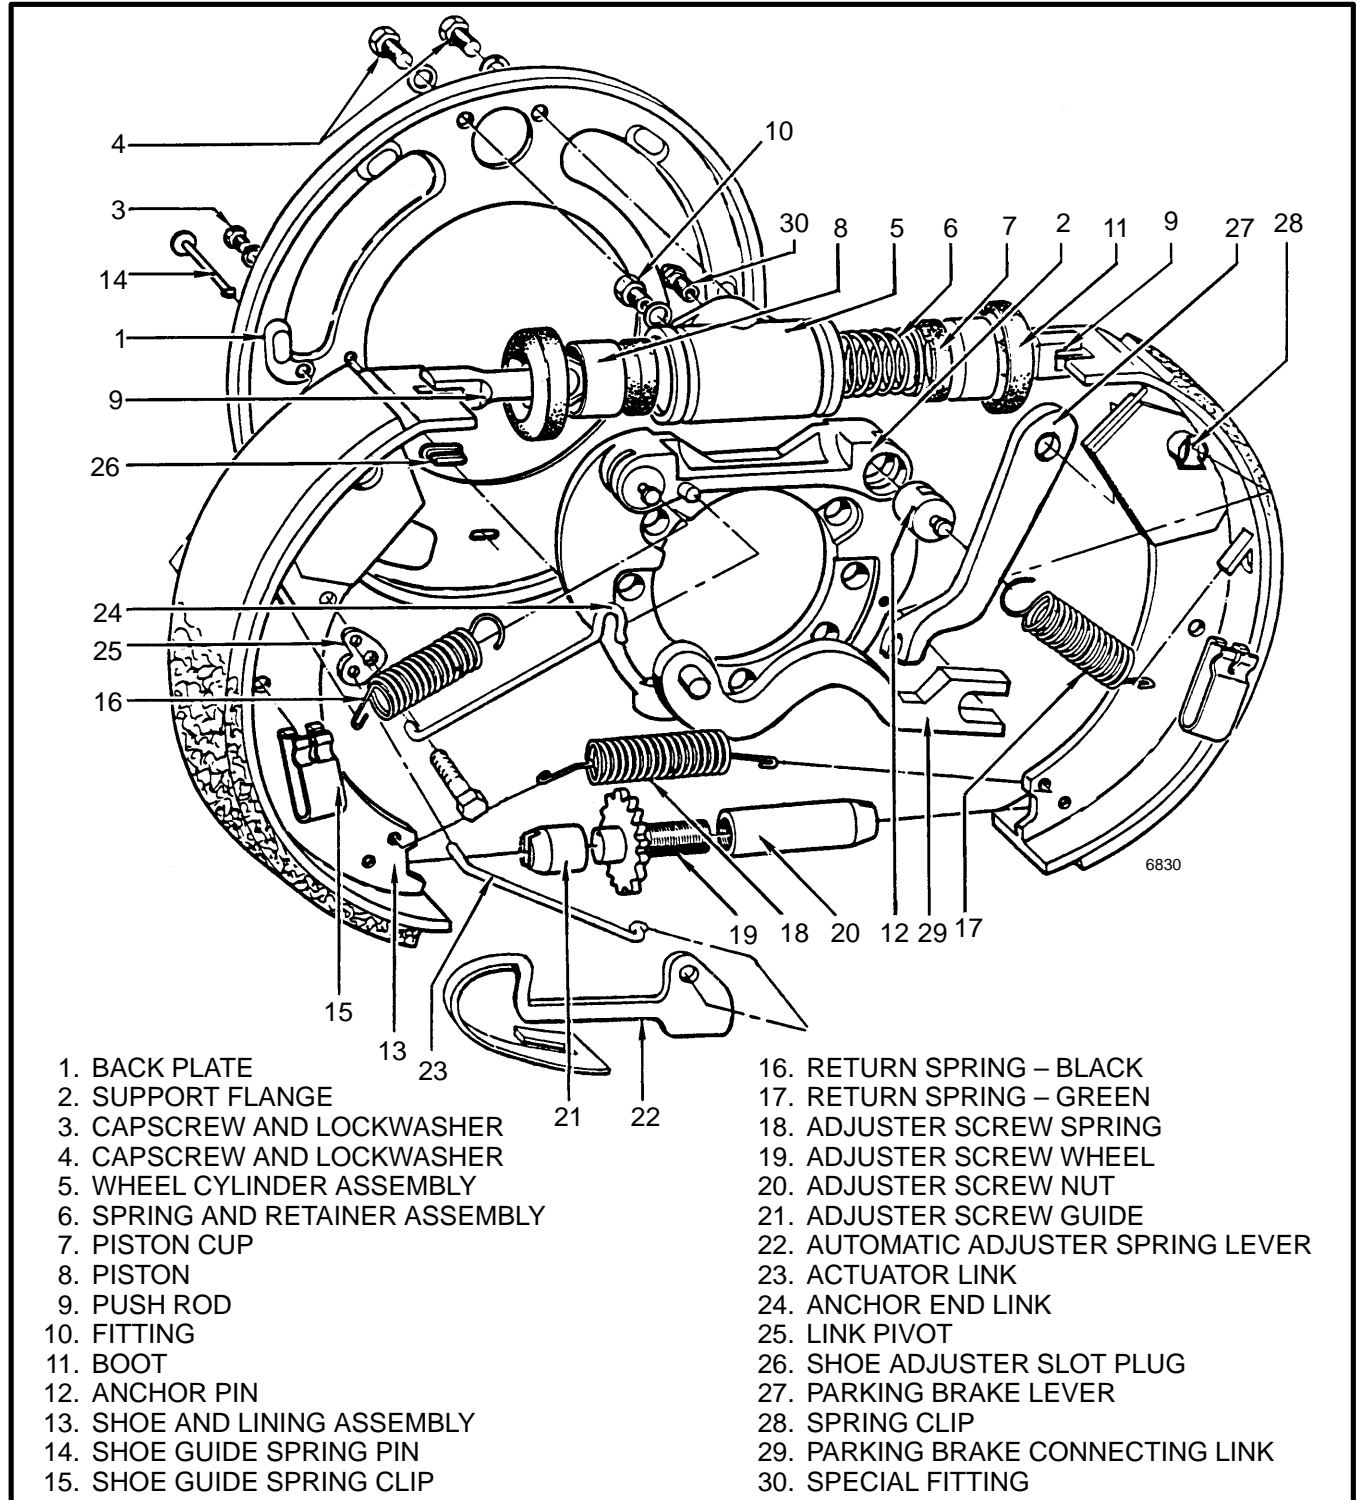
BRAKE ASSEMBLY - RIGHT
